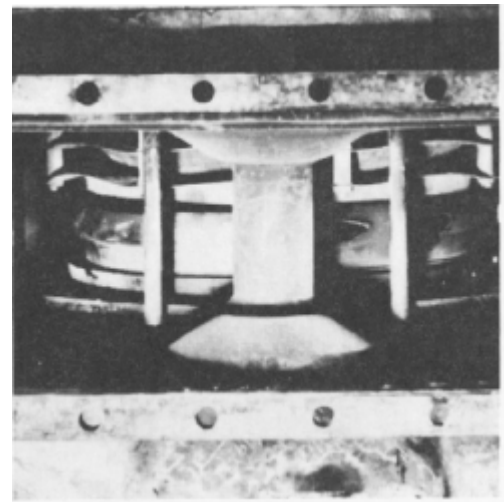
View Down The Exhaust Stack Of A Warped Diffuser And Damage From Broken Blades
